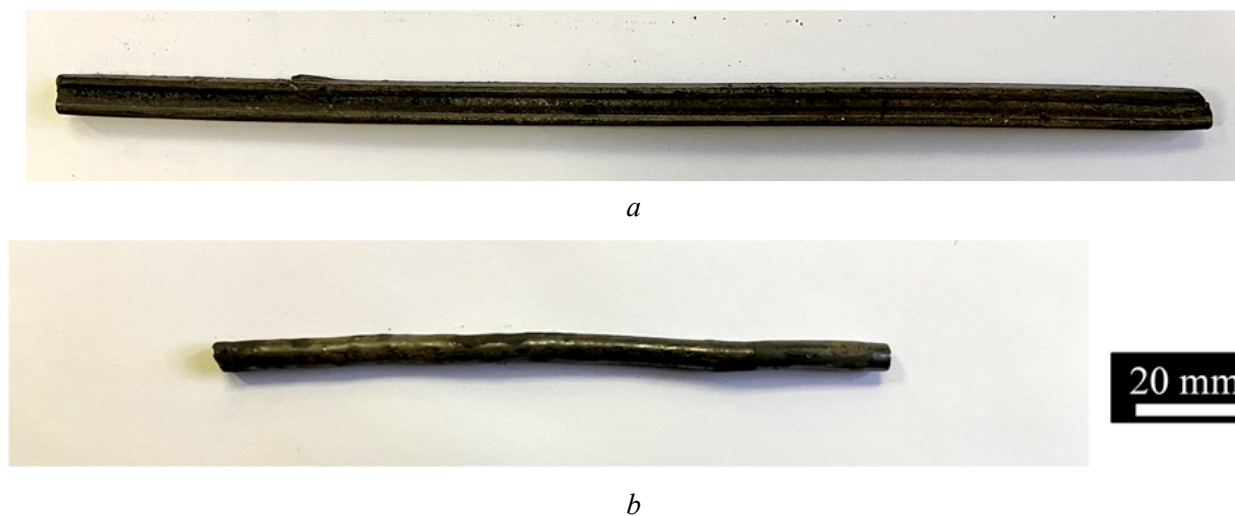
Photograph of a *TiNiHf* alloy rod after caliber rolling (a) and rotary forging (b)
